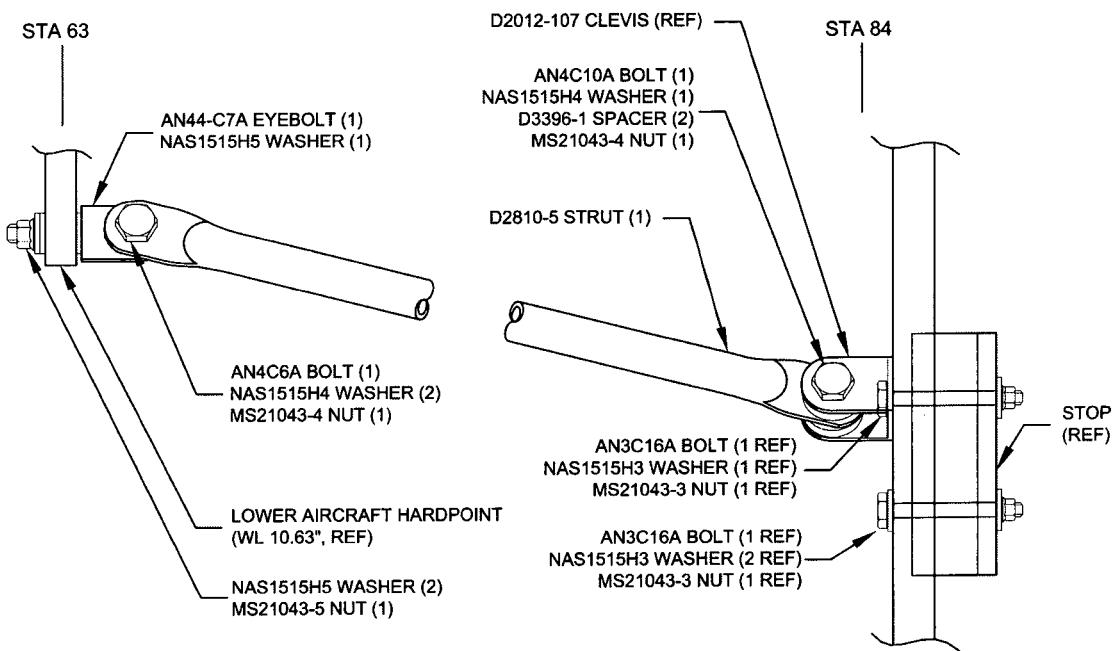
Strut Detail for D412-630-023/-024 *Heli-Access-Step™* Installation
